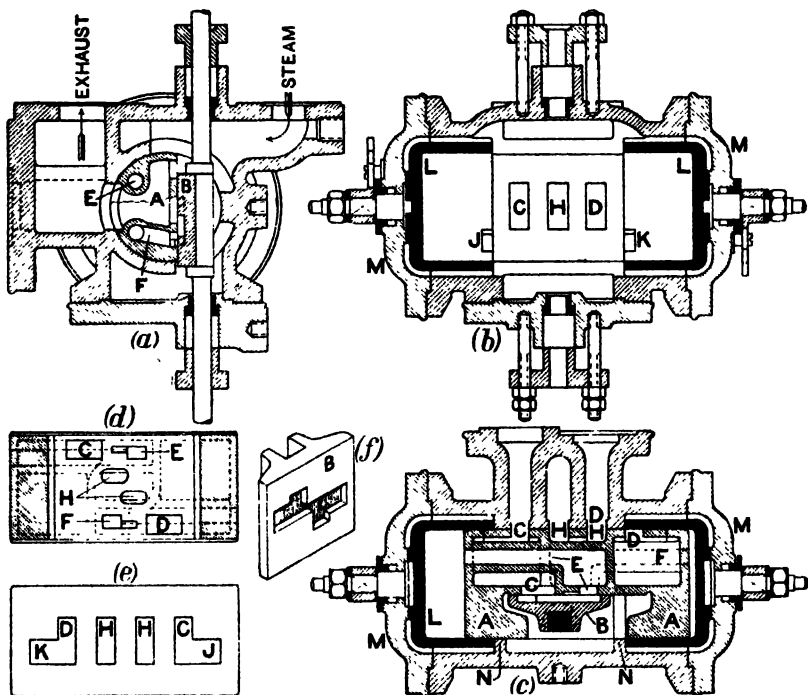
Valve chest and steam valves of Weir's feed pump.
